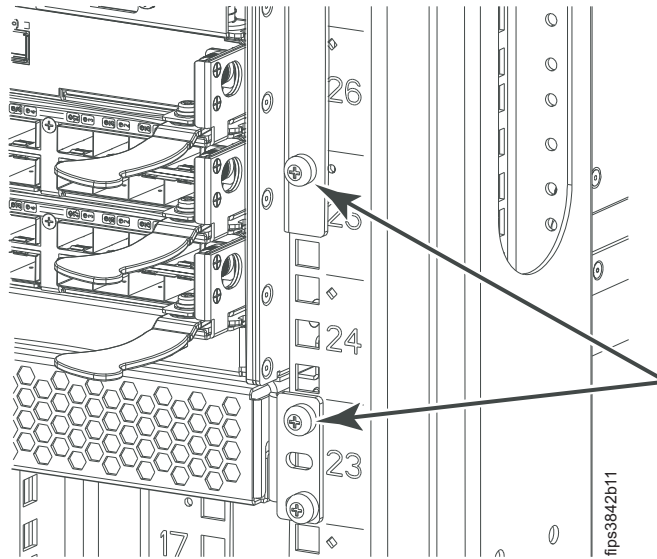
Lower right 2499-416 rackmount screws to remove for FIPS bracket installation (detailed port side view)
